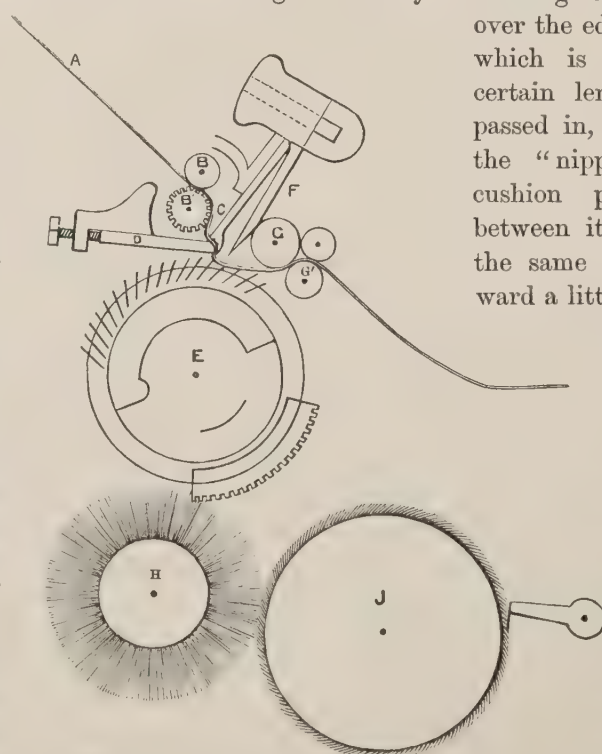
SECTIONAL VIEW OF COMBING MACHINE.
